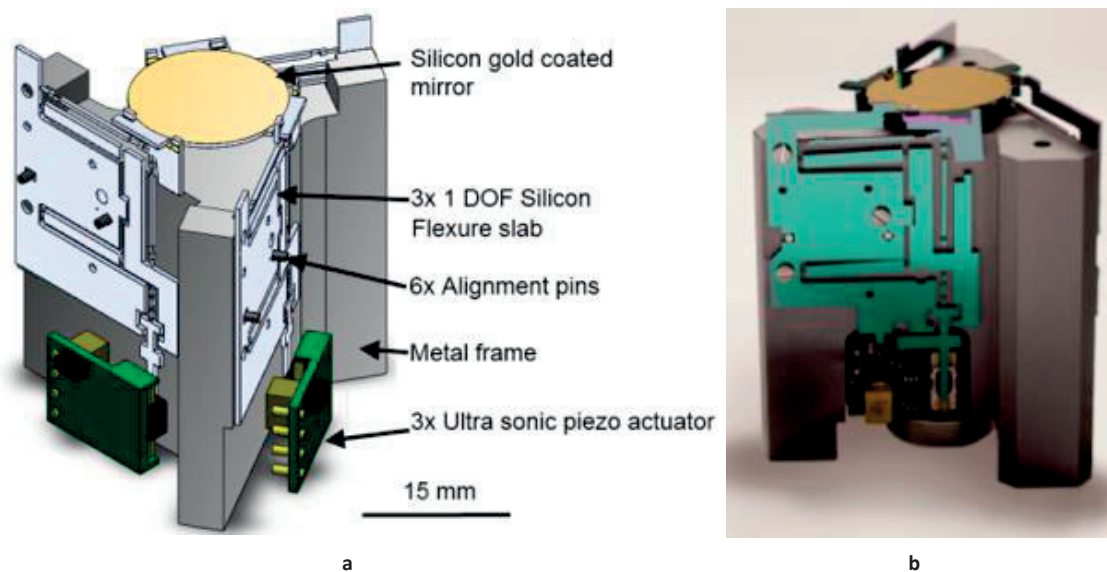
a) The layout of the tip Tilt Piston Mirror Mechanism. b) The realised version of the Tip Tilt Piston Mirror Mechanism.
